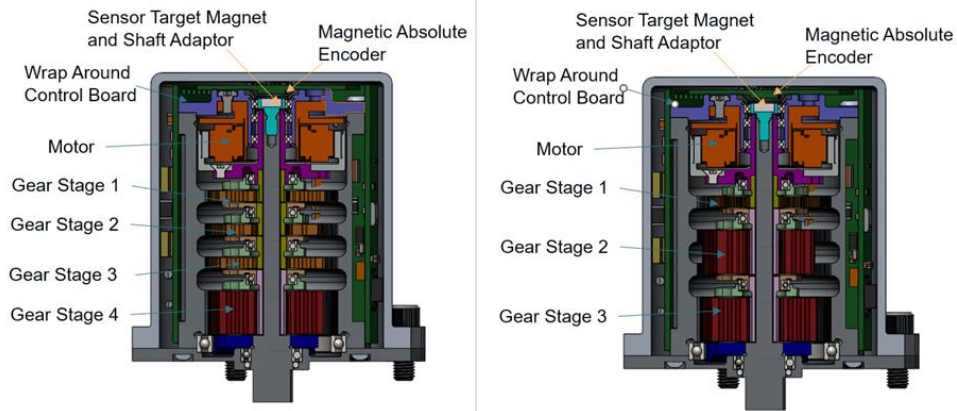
Motor and Geartrain Assembly Cross Section with Different Gear Reduction Options
